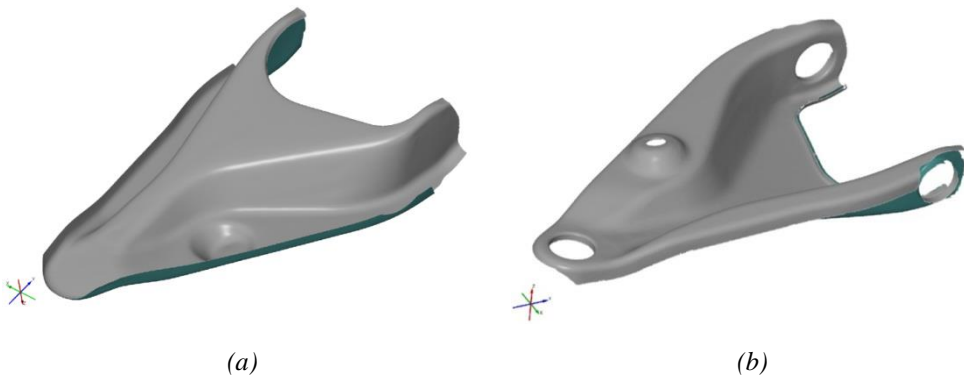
Digitized surface of (a) pressing tool and (b) pressed part
